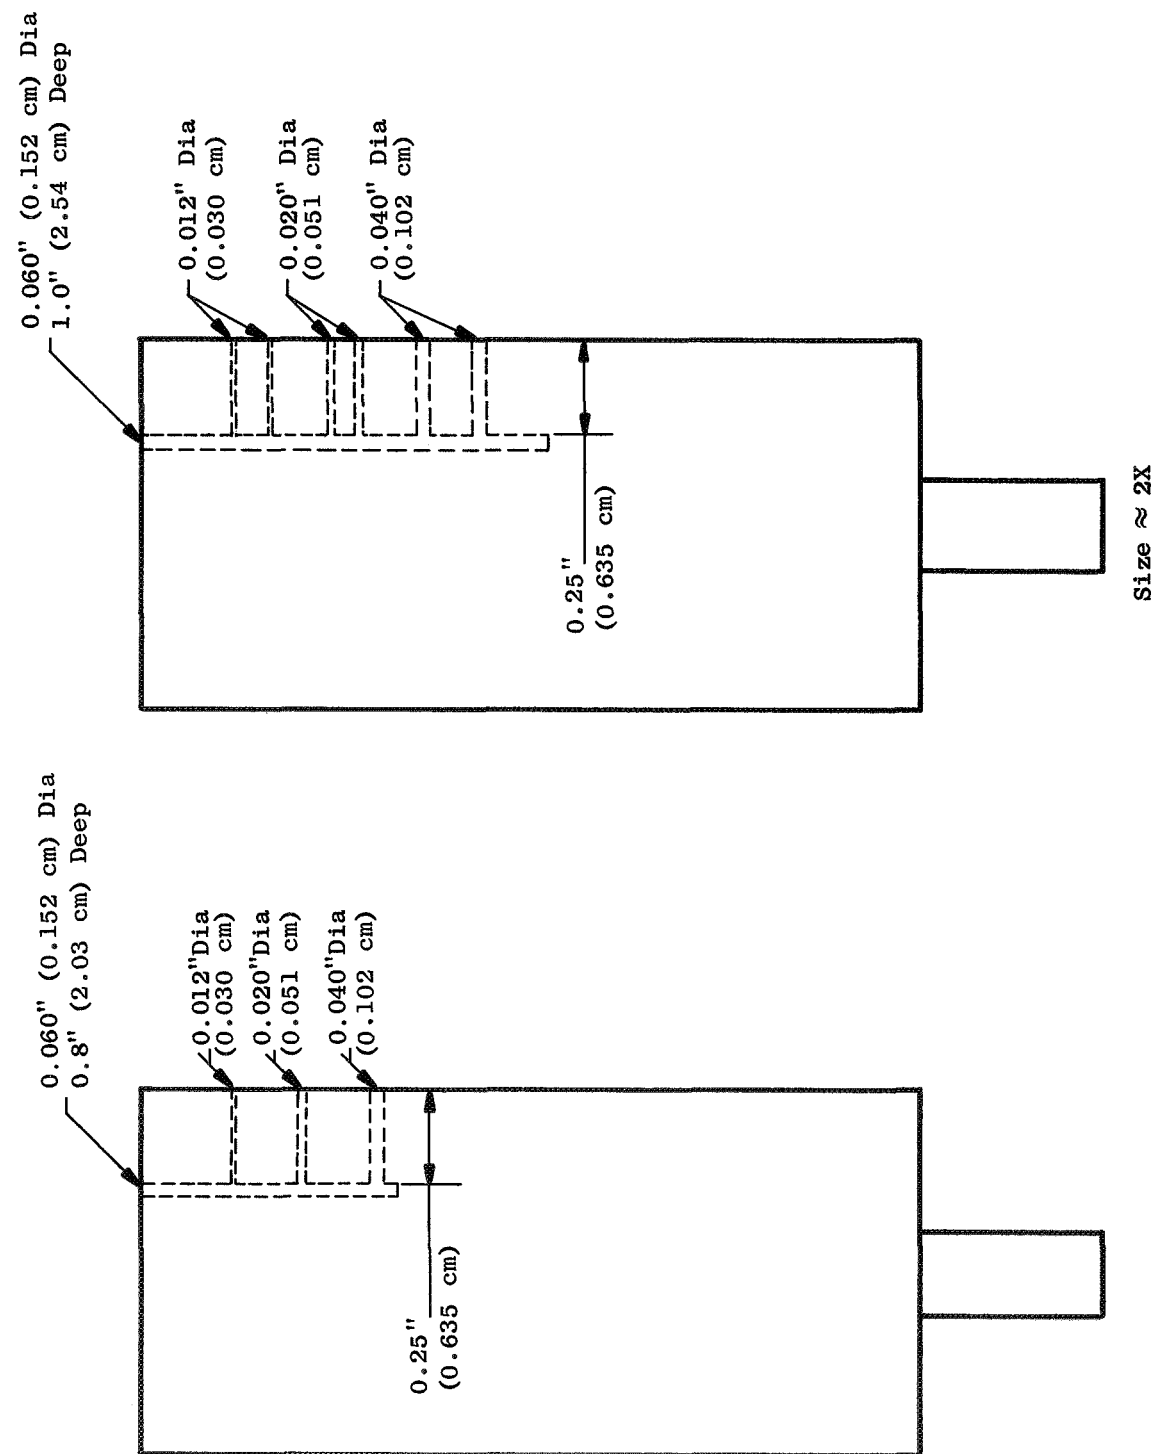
EDM Hole Patterns on Paddle-Wheel Specimens.
